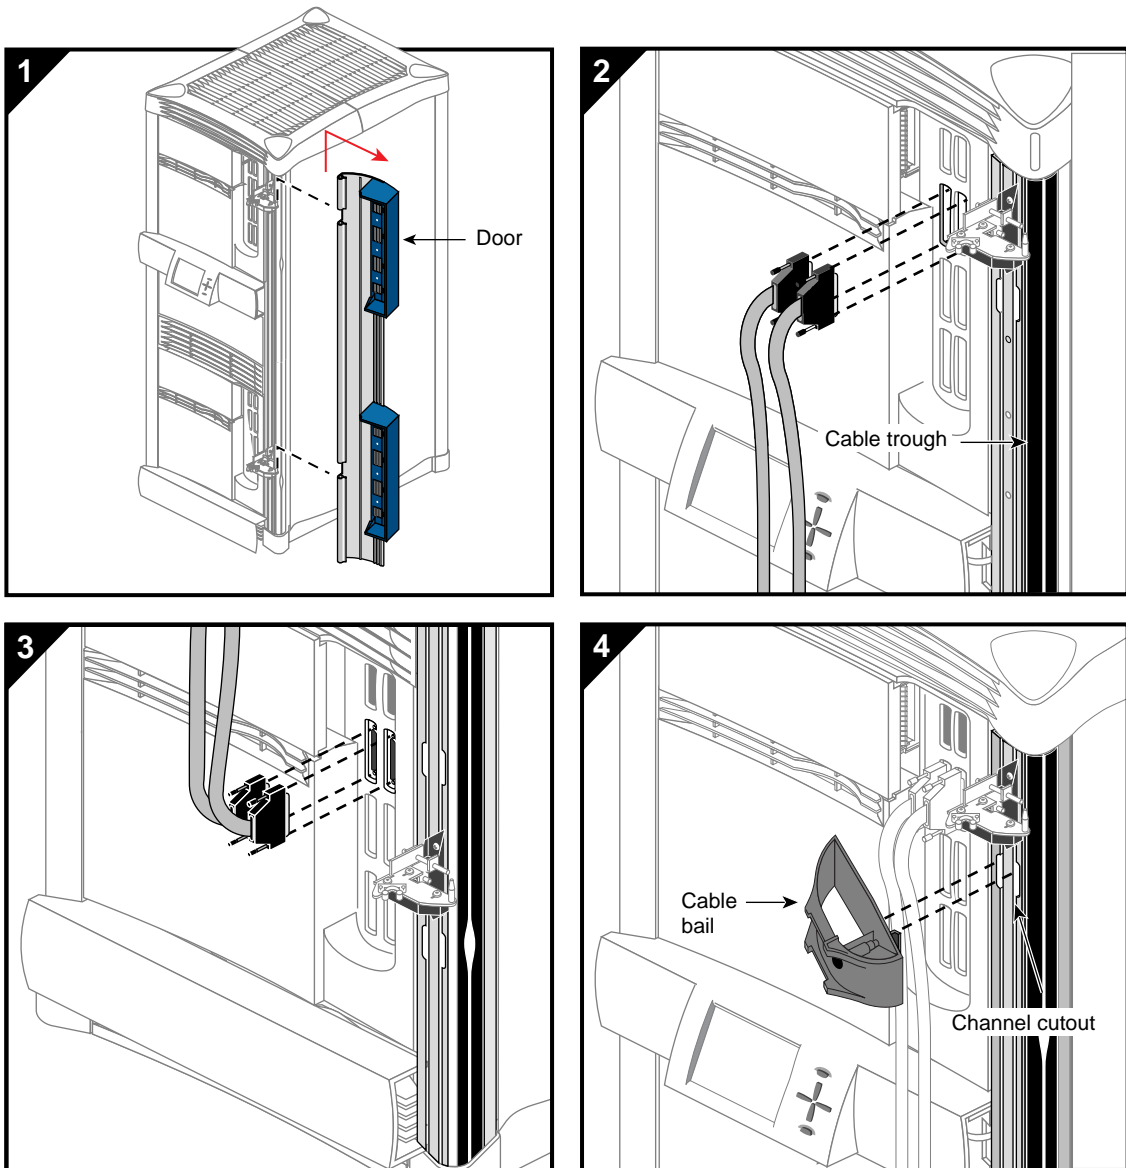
Installing Cables Between the Top and Lower Modules in a Rackmount System
